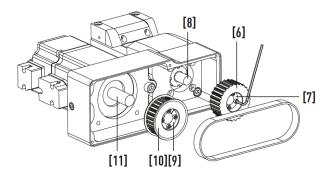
Mounting of motor flange, clamping screw and motor
